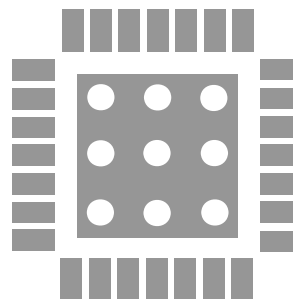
ISL97686 TQFN PCB VIA PATTERN
